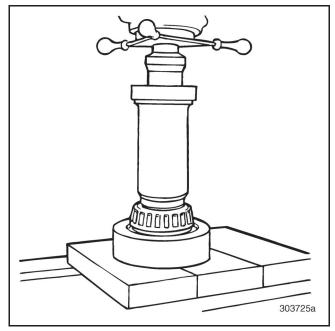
Pressing Bearing Cone onto Rear-Drive Shaft
